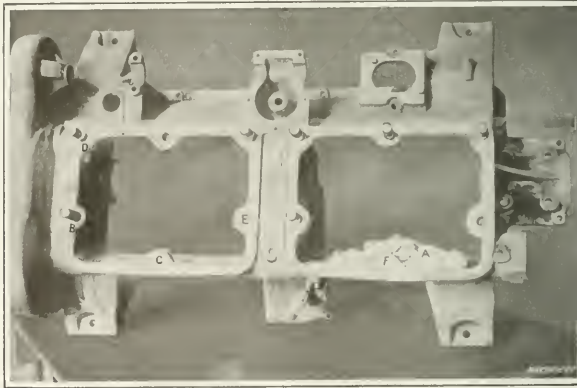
Aluminum Crank-case showing Method of preventing Cracks in Welding
